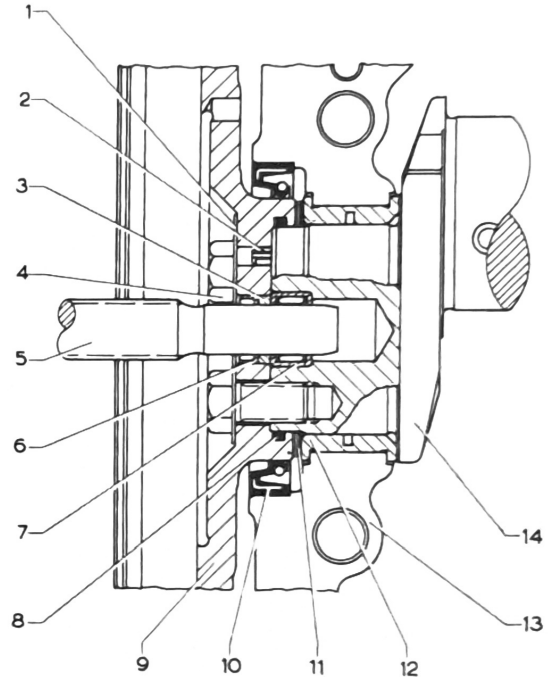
26 Sectioned view of the flywheel attachment and rear oil seal
